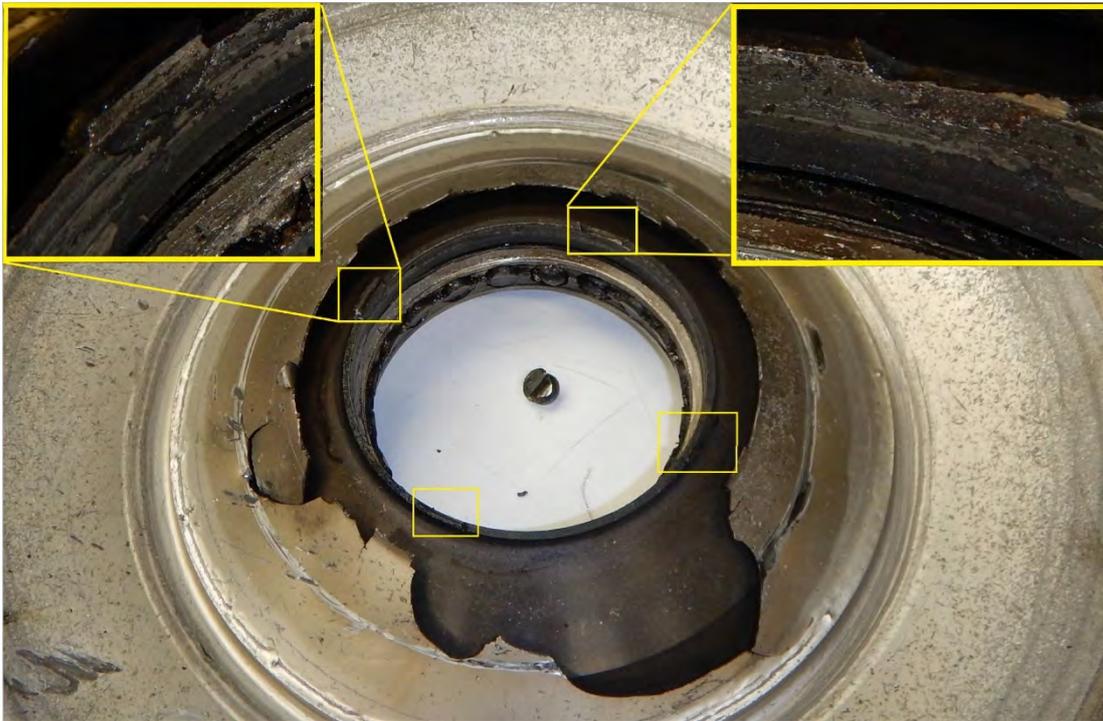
Low-Pressure diffuser case fracture surfaces stator seal web
